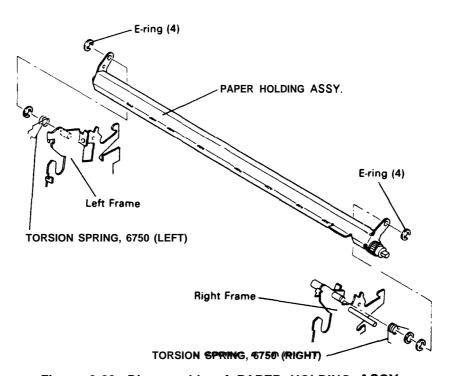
Disassembly of PAPER HOLDING ASSY.
